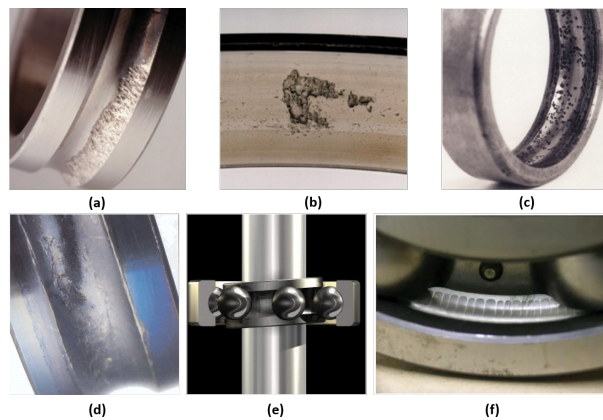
Bearing damage by different causes: (a) Overloading; (b) Fatigue; (c) Corrosion; (d) Lubricant failure; (e) Bearing misalignment; (f) Electrically induced fluting [1], [7].
